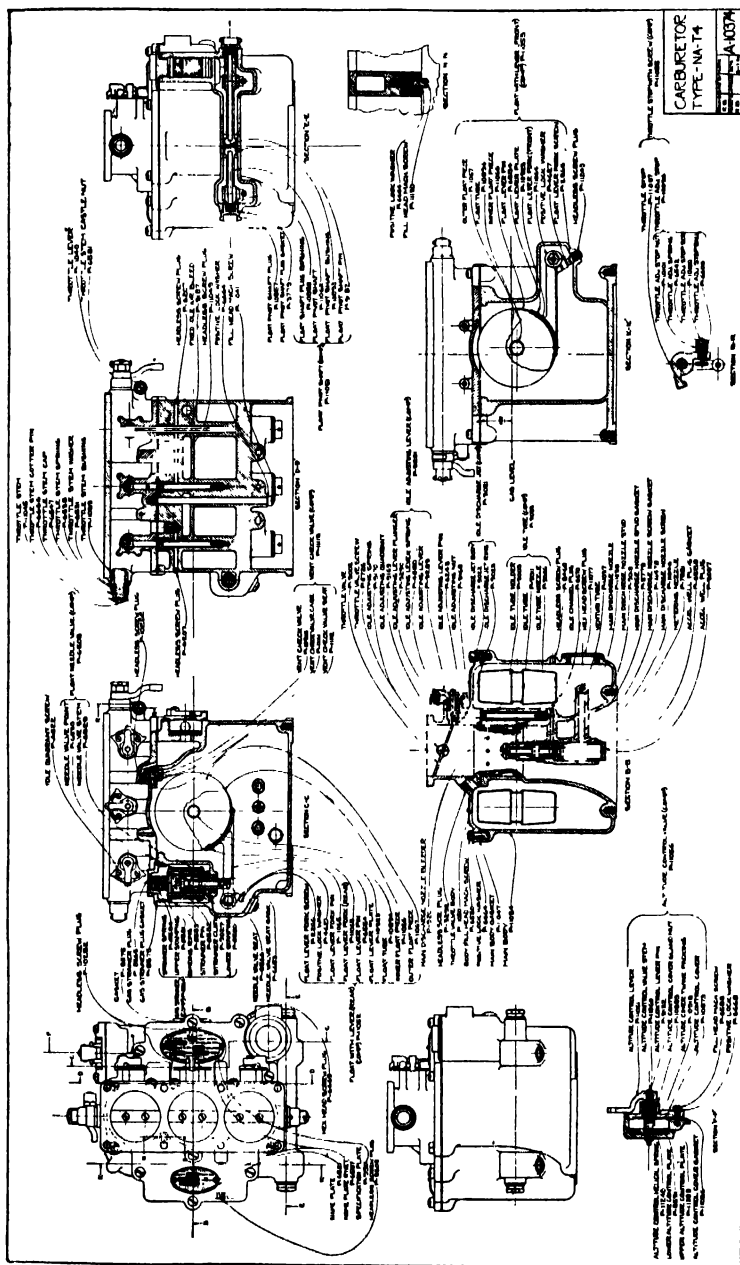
Drawings Showing Construction of the Stromberg Type NA-T4 Carburetor Used on Model J5 Engines.
